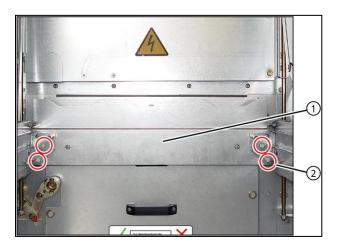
4 bolted joints on protection plate of switching-device compartment
